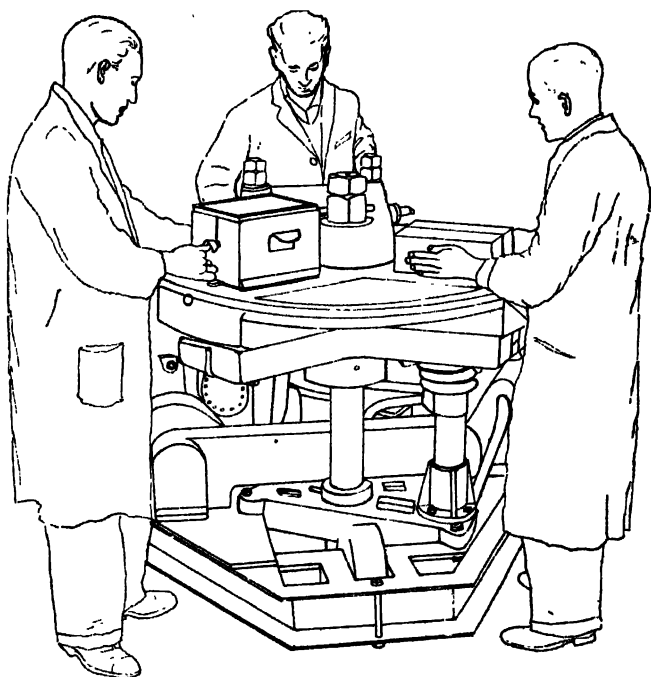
WINGET ROTARY HYDRAULIC BLOCK-MAKING MACHINE
